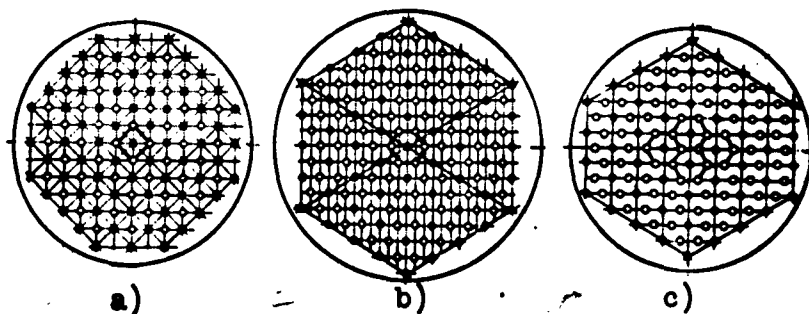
Schematic diagrams of fuel-nozzle arrangements on engine-chamber head.
